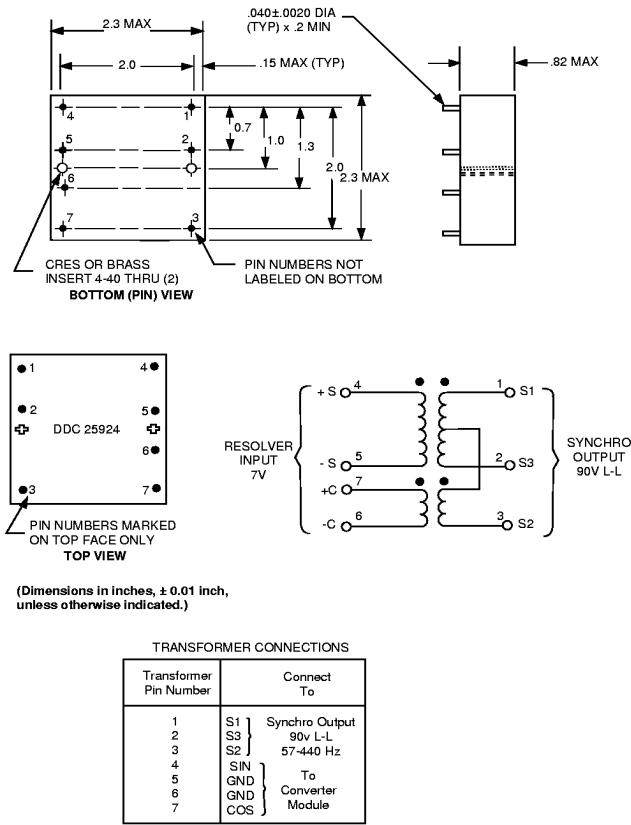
MECHANICAL OUTLINE, 60 HZ EXTERNAL SYNCHRO TRANSFORMER - DDC-25924
